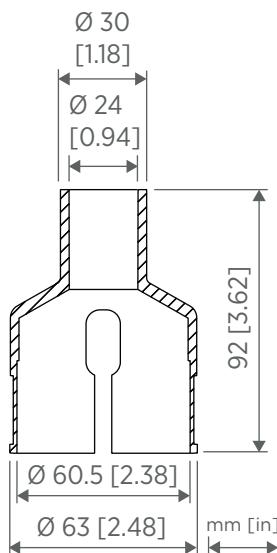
Mounting accessory (WMSFIX60) for connecting mounting kit (212792) and 60-mm tube
